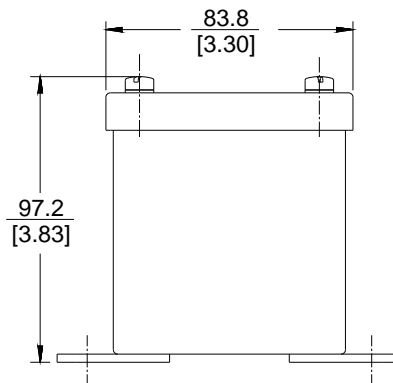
135613-AXX Dimensional Drawing (Top View)
